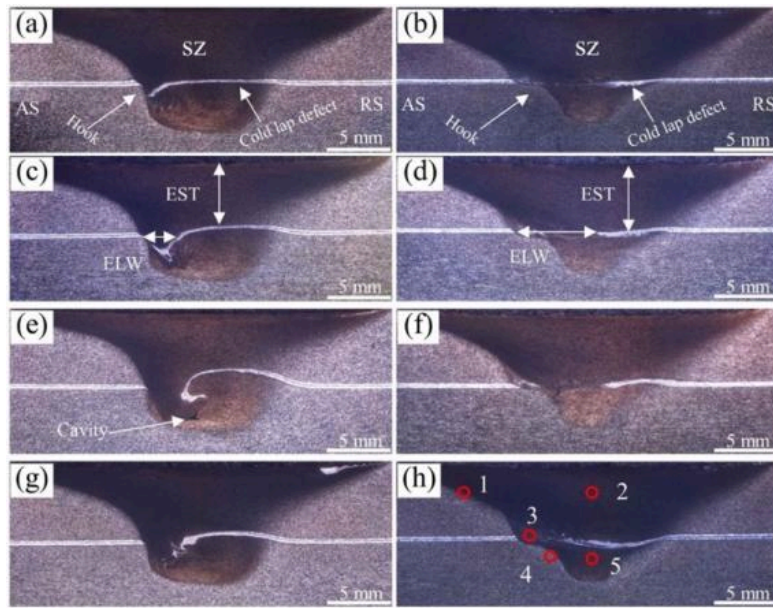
Macrostructural cross-section of FSLW joints made with different tool designs under various welding condition: (a, c, e, g) T-pin, (b, d, f, h) S-pin, and (a, b) 400/100, (c, d) 400/200, (e, f) 400/300, (g, h) 600/200 [37]
